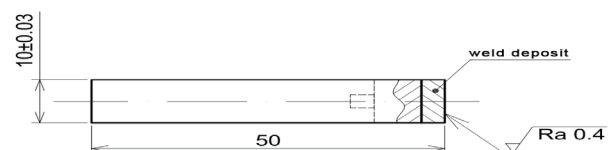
Shape and dimensions of the sample with weld deposit
